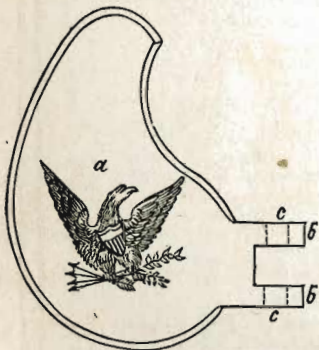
Magazine-cover, full size. *a*, body; *b, b*, jaws; *e, c*, holes for joint-pin.
